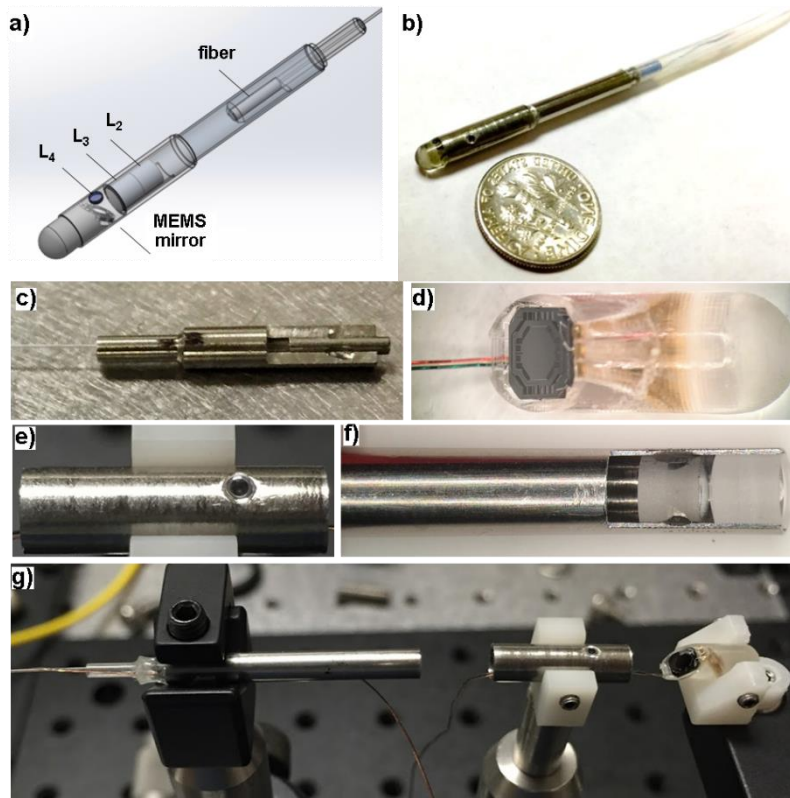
Packaging and alignment. a) CAD drawing shows how instrument is packaged. b) Assembled endomicroscope c) Fabricated fiber ferrule holder. d) MEMS chip mounted on a 3D printed holder. e) Fabricated side-view lens holder. f) Fabricated focusing lens holder. g) Assembly and alignment process.
